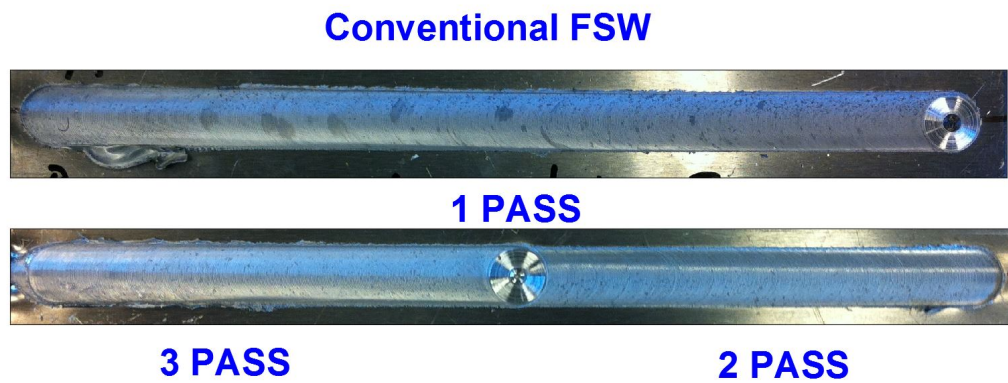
Superficial condition of multi-pass welds (2 and 3 passes) which were carried out as same welding parameters as weld 3.
